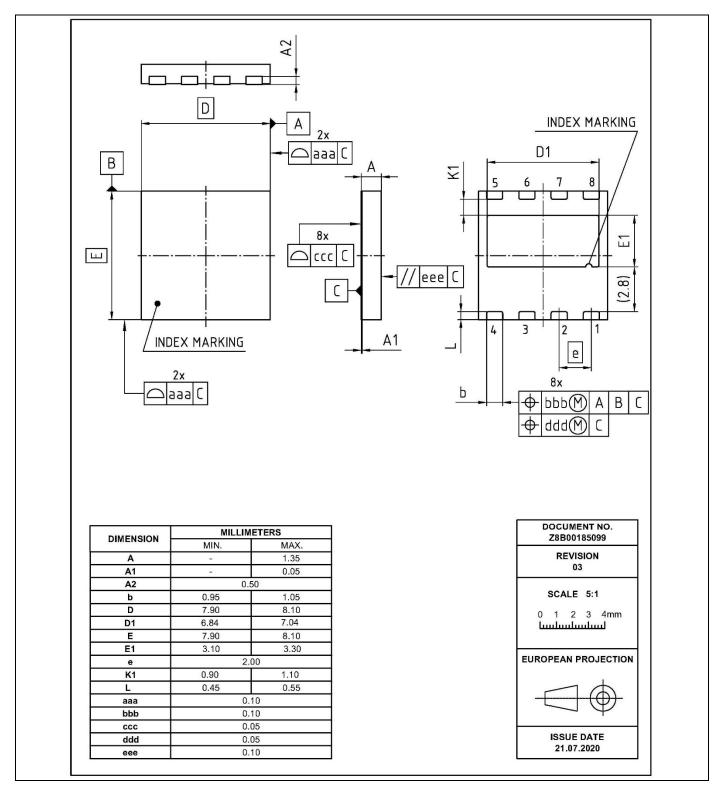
PG-LSON-8-1 Package Outline, dimensions (mm)
